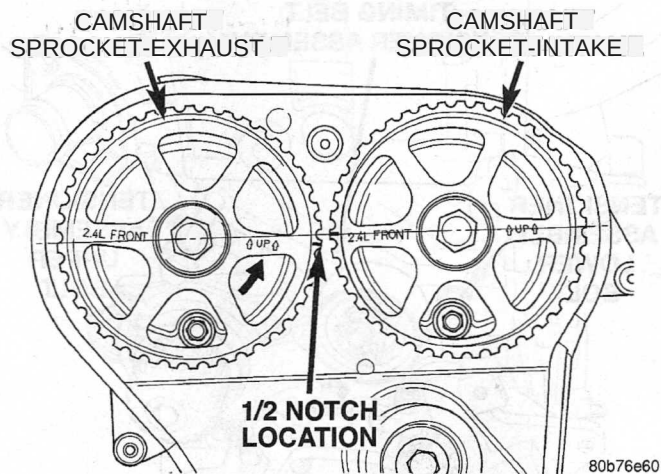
Camshaft Sprocket Alignment For Timing Belt Installation
